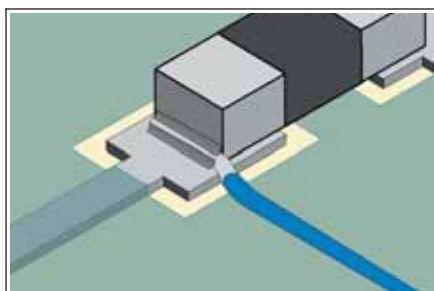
Acceptable Wire soldered to pad, parallel or perpendicular to component.
